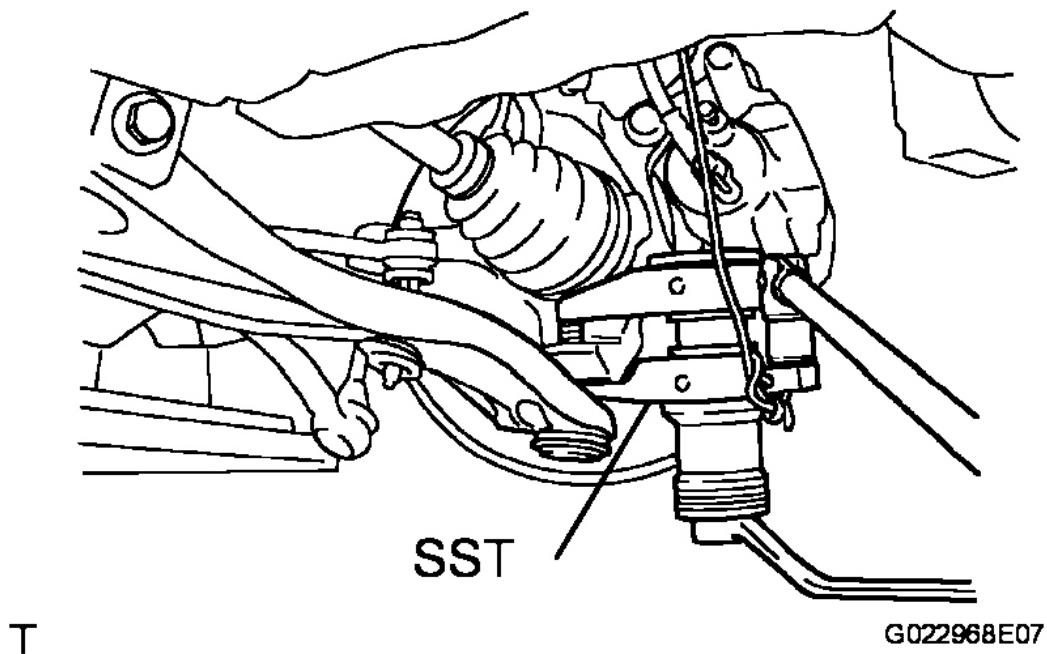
Disconnecting Front Suspension Arm Lower LH
